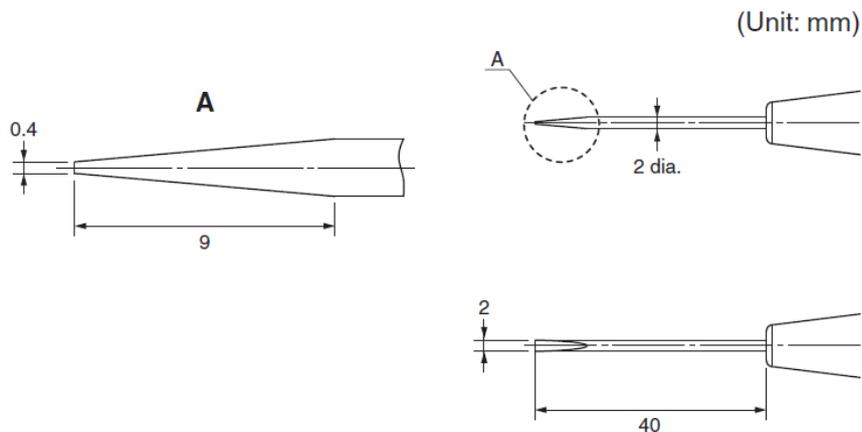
Screwdriver dimensions for the Terminal Blocks
